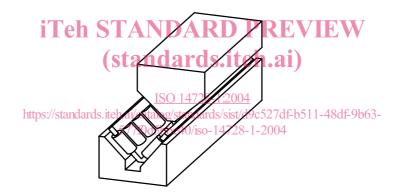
Non-recirculating linear roller bearing, linear guideway, V-angle type
